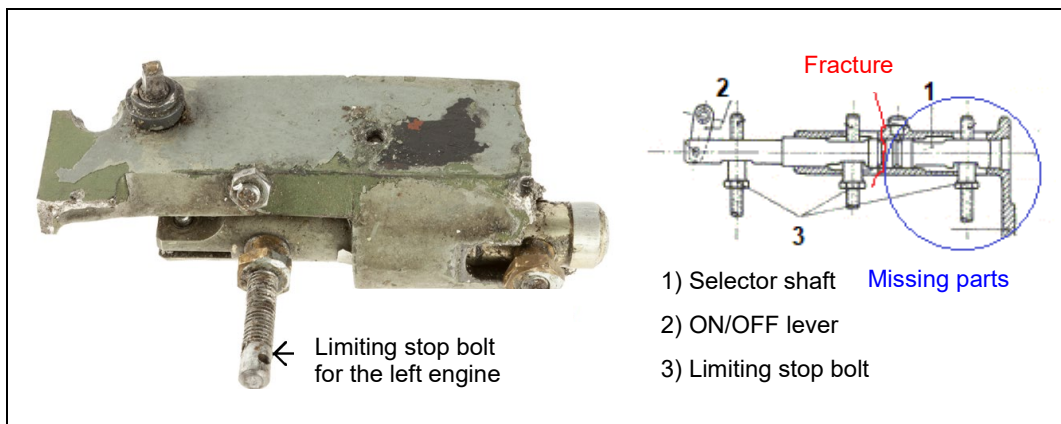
Fragment of the full-throttle limiting mechanism with limiting stop bolt for the left engine.
